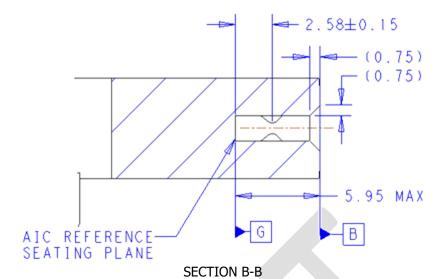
2C RIGHT ANGLE ORTHOGONAL SMT CONNECTOR DIMENSIONS (MM)
